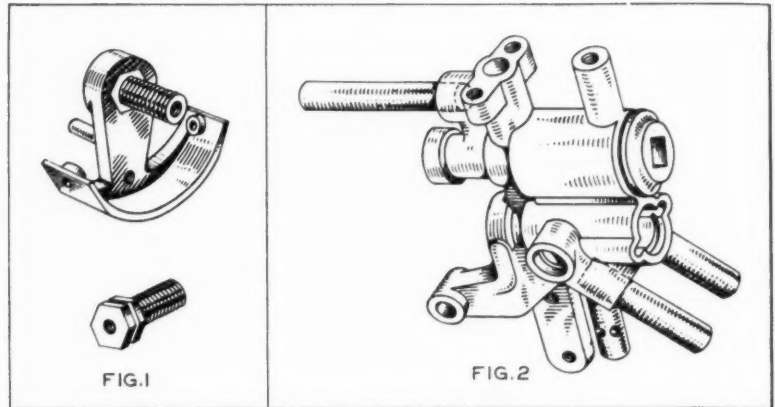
Brass Insert Made on Screw Machine. When Cast in Place, the Hexagon Head Prevents Turning and the Groove in the Head Anchors the Insert. Fig. 2. Four Copper Tubes Cast into a Fitting
